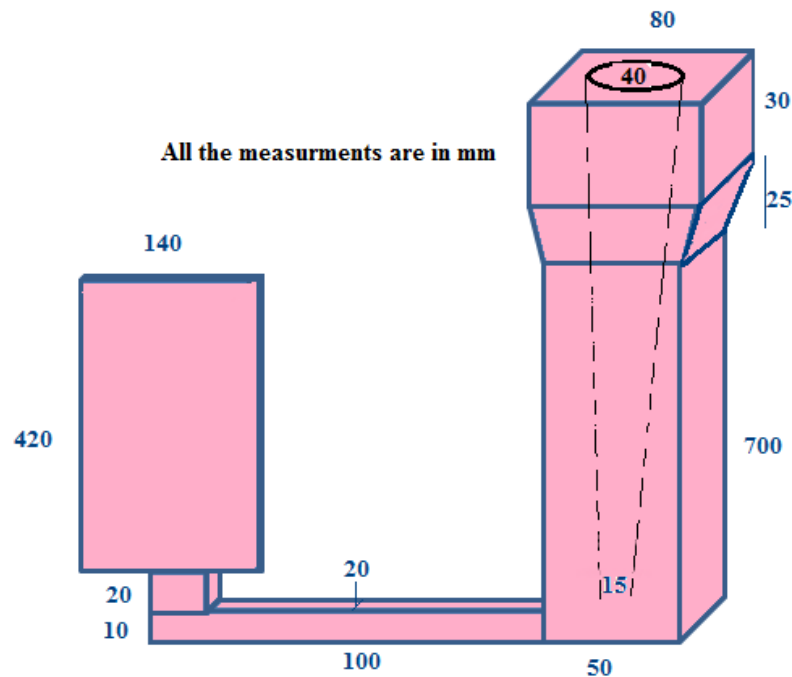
Pattern assembly for the bottom filled LFC with irradiated and untreated foam patterns.
